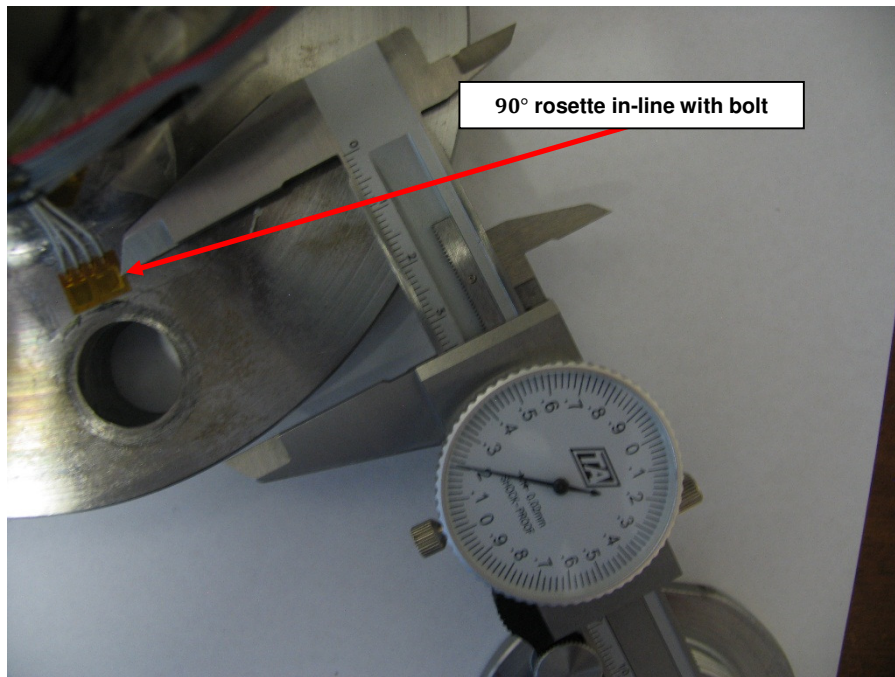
Photograph of the position of the 90° rosette which is in-line with the bolt on the ring of the raised face flange
